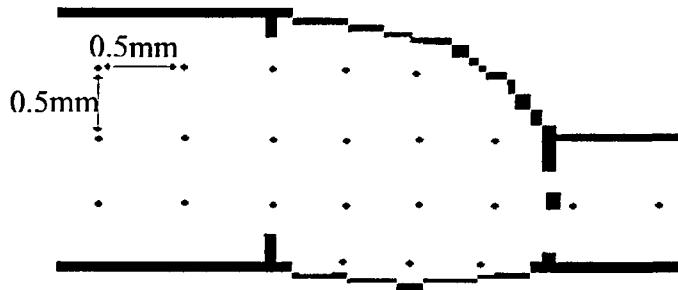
Microhardness Map (0.5mm) across a dissimilar thickness Laser Hybrid Butt Weld
